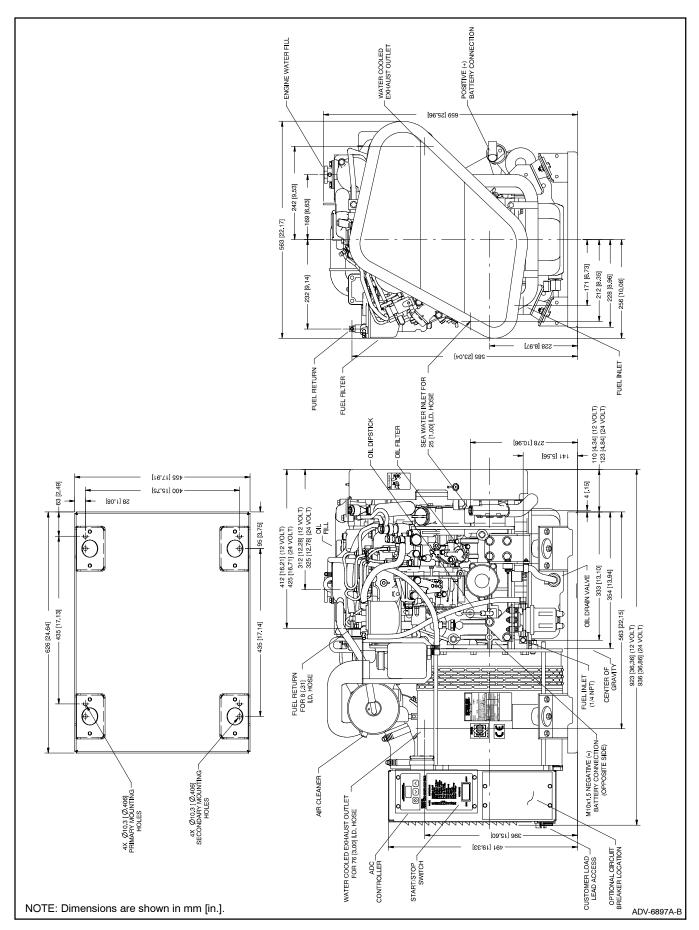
Dimension Drawing, 14/15.5EOZD and 11.5/13EFOZD
